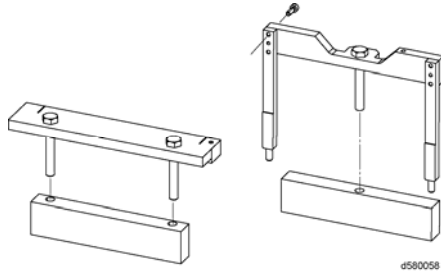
W470589034000 – Camshaft Timing Tool (TDC)
